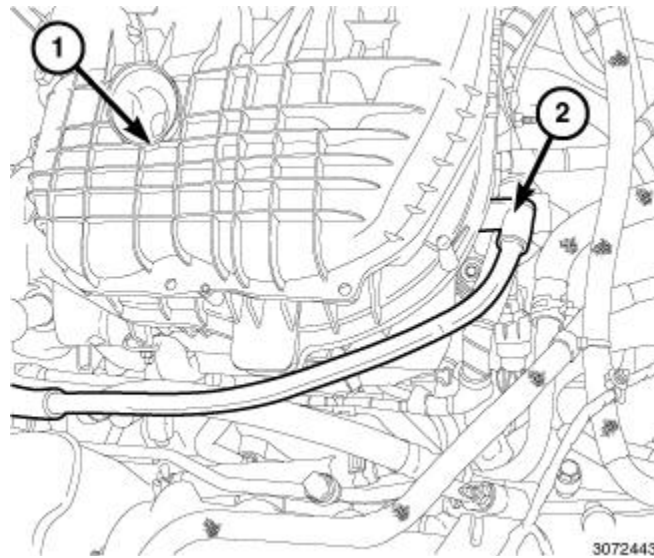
Fresh Air Makeup Hose At Rear Of Intake Manifold
